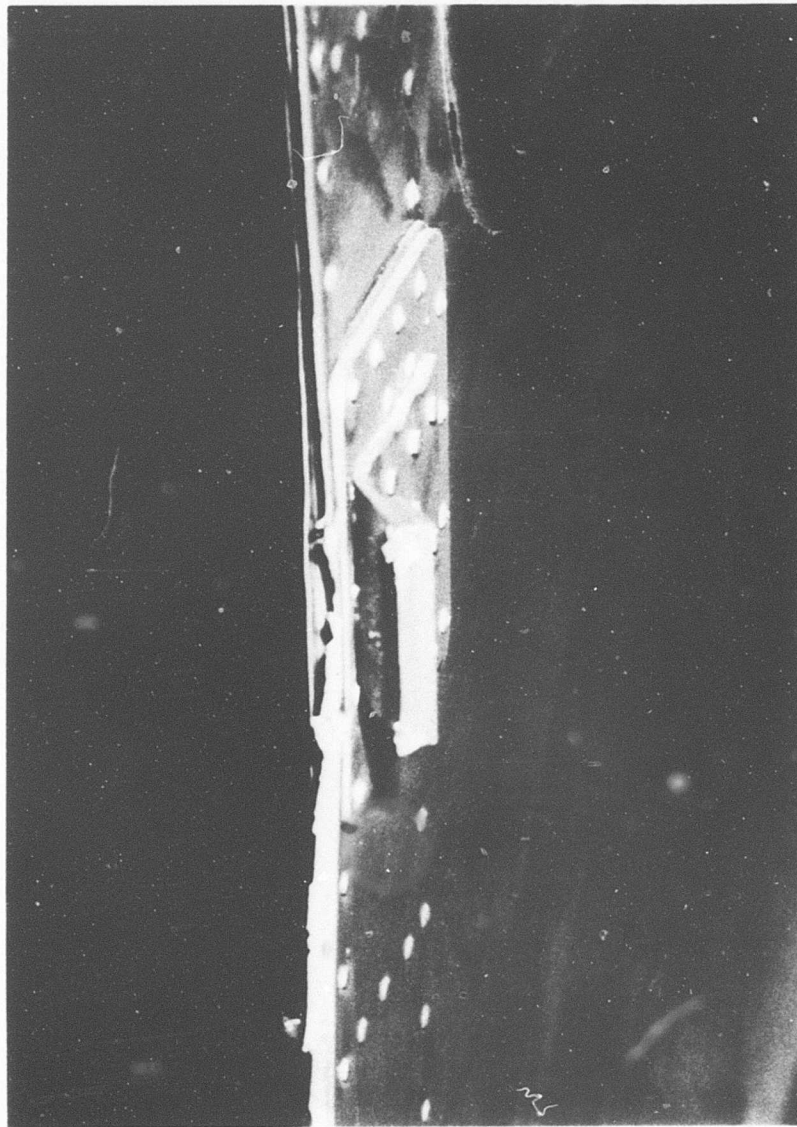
View Showing Deformation of New Striker Plate and Damage to Aft Edge of Door.
